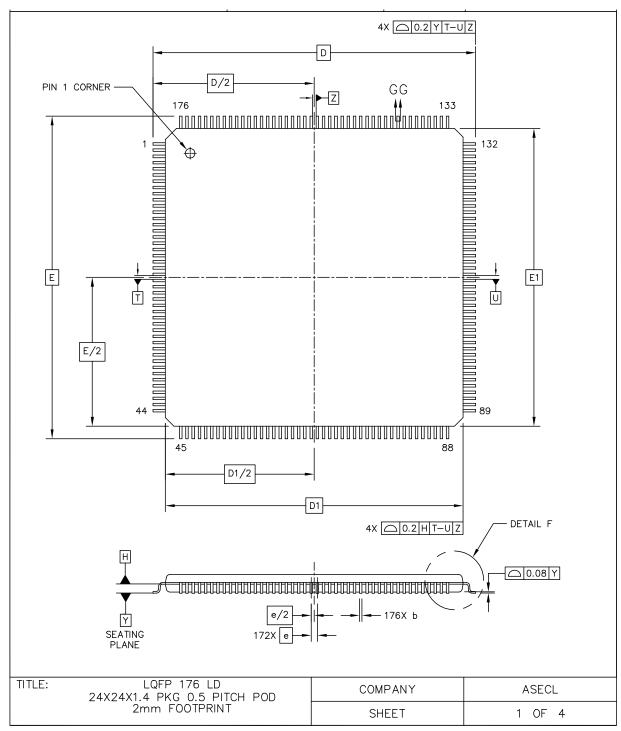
176 LQFP Package Mechanical Drawing (part 1)
